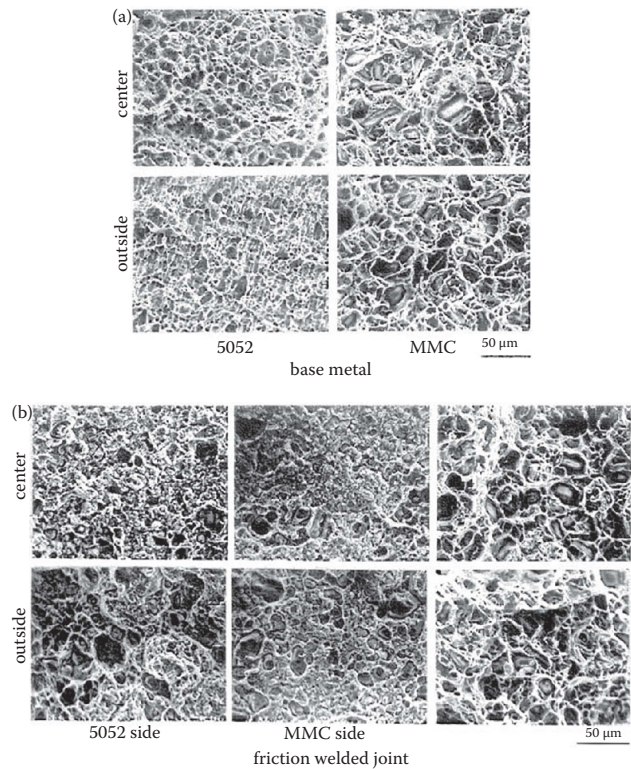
Microfractographs of tensile fracture surfaces of base metal and friction welded joints
